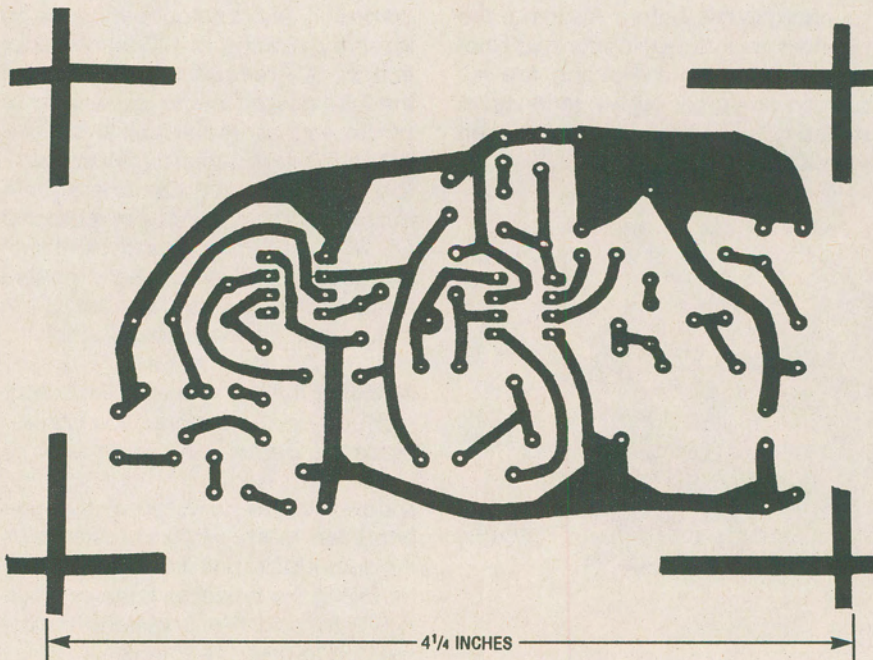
While there is nothing critical about the construction of the Weather Alert Decoder, it is recommended that the circuit be assembled on printed-circuit board. Here is a template of the PC-board pattern used by the author.
